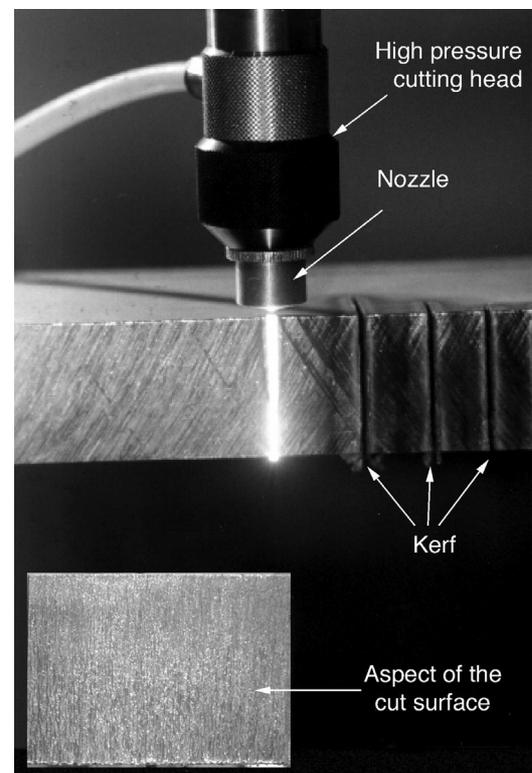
Thick plate cutting with NdYAG Laser (EUPT) (40 mm thick plate cutting in the photo and 60 mm thick steel, 6 kW NdYAG with nitrogen gas cutting speed: 0.003 m/min)
